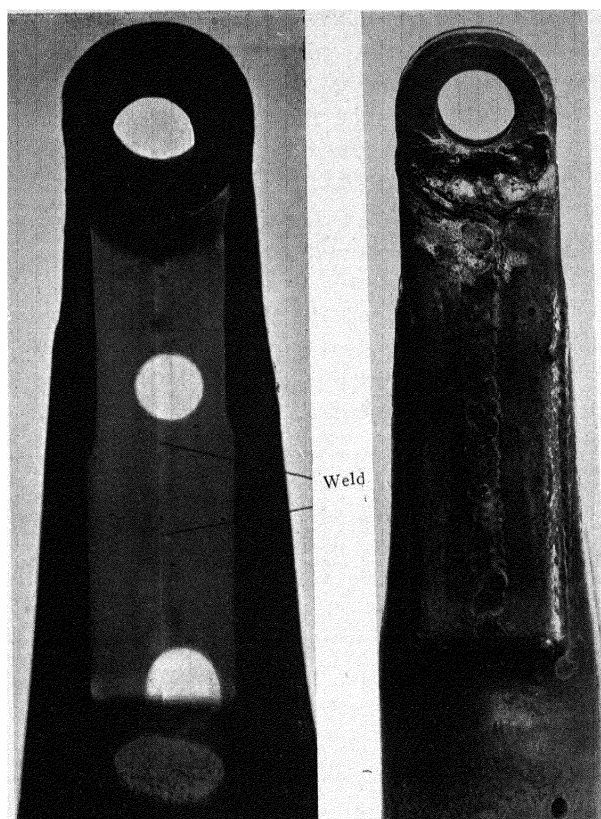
PHOTOGRAPH AND RADIOGRAPH OF A WELD IN A STEEL AEROPLANE FITTING
